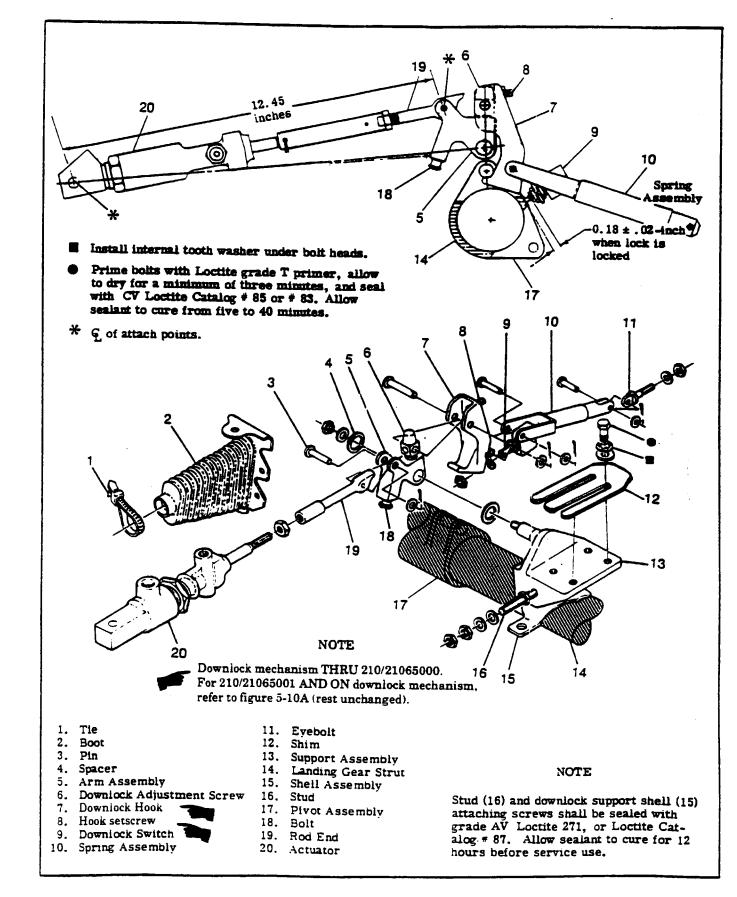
Rigging Main Landing Gear (Sheet 1 of 3)
